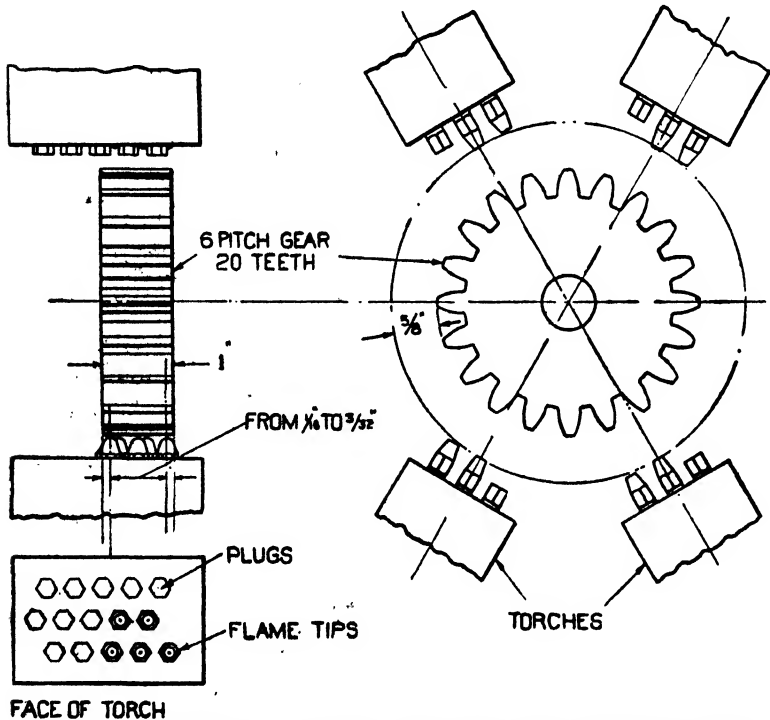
A.—Arrangement of torches on the Fellows flame-hardening machine.
